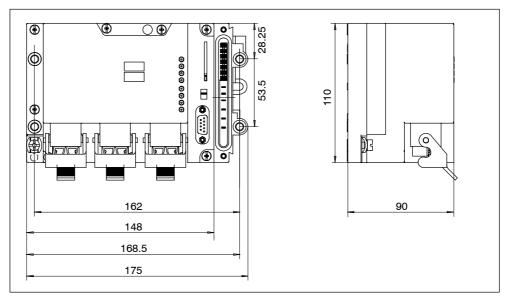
Dimensioned drawing of basic module BM 147 CPU (BM 147-2 CPU is shown)
